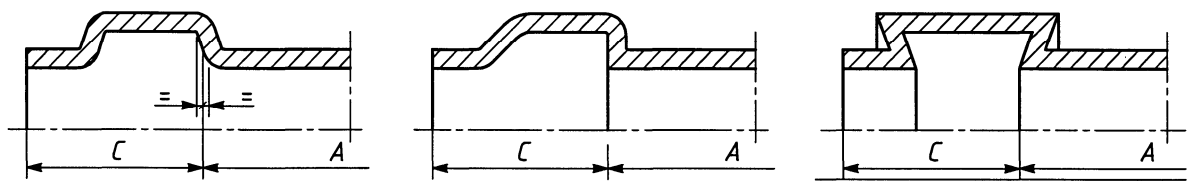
Typical groove designs for elastomeric ring seal sockets
